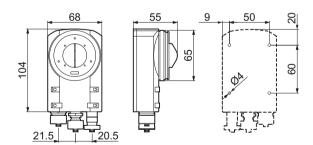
Dimension drawing: SIMOCRANE CenSOR MV440 camera
